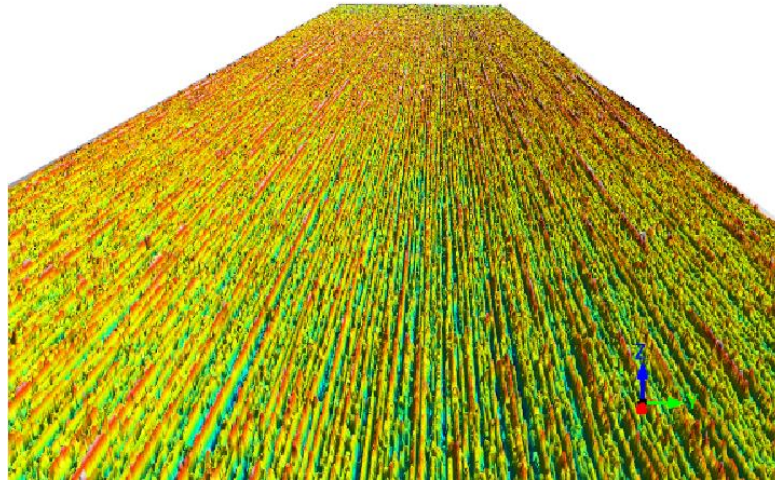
Final surface finish on a fatigue test specimen following a longitudinal polish.
